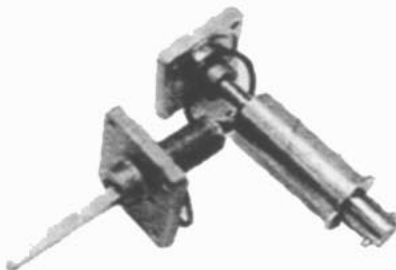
Arm bellows assembly (12) and drive shaft (2) and crank (3) removed from vane position indicator.
